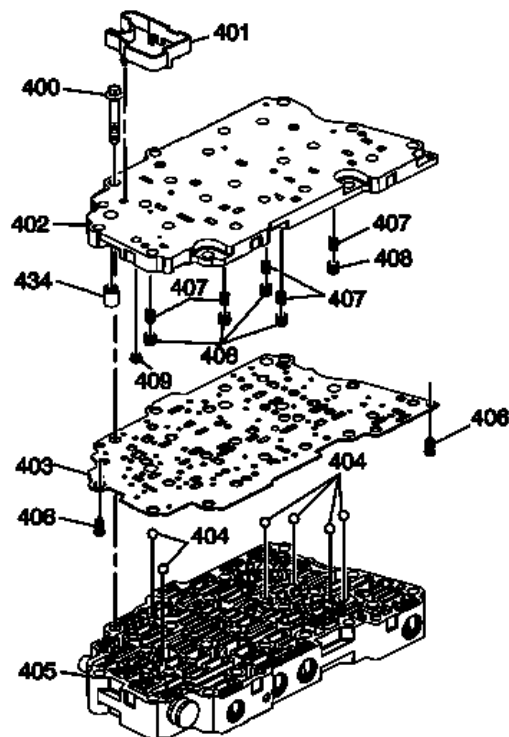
Control Valve Body Assembly -- Gen 2 (1 Of 2)
